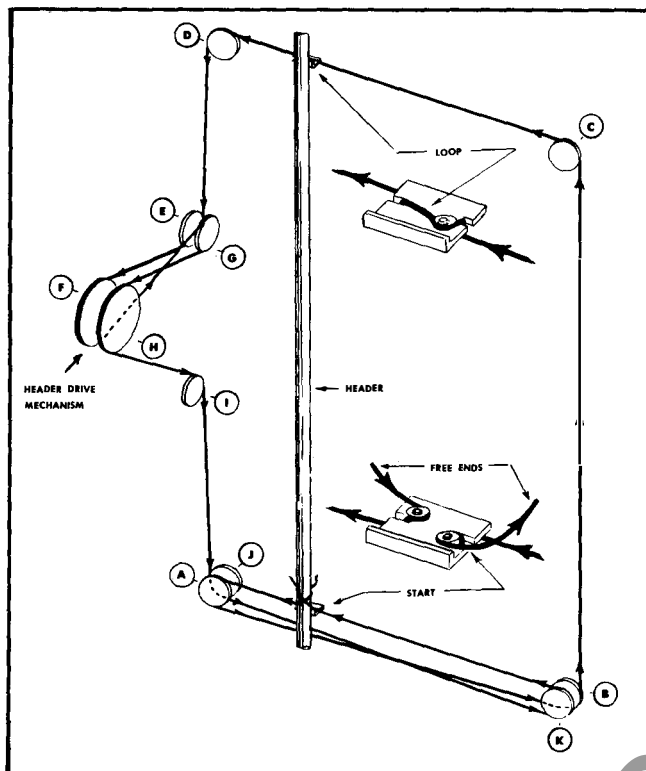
Cable Routing with Drive Mechanism on Left Side Wall
